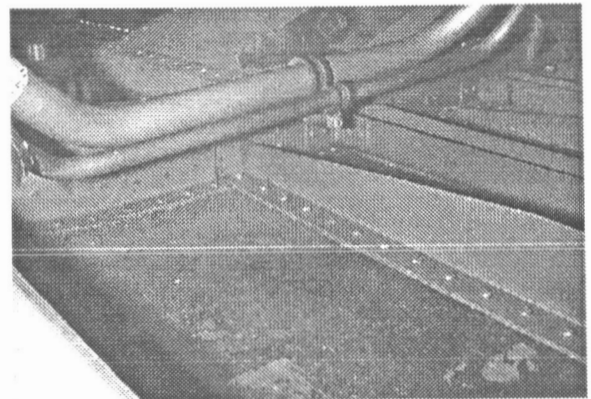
Inside view (looking aft) from the FLIR showing wheel well fairing skin and supporting structure.
